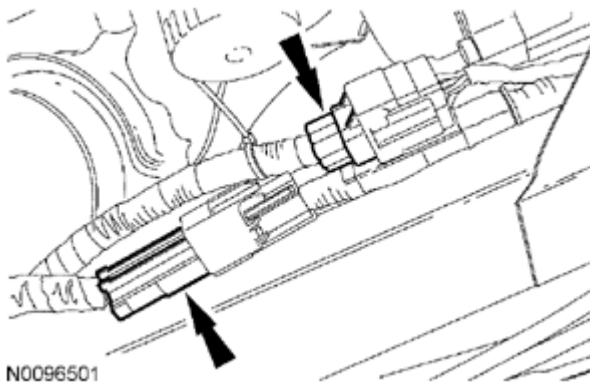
Locating Electronic Power Assist Steering (EPAS) Electrical Connectors
